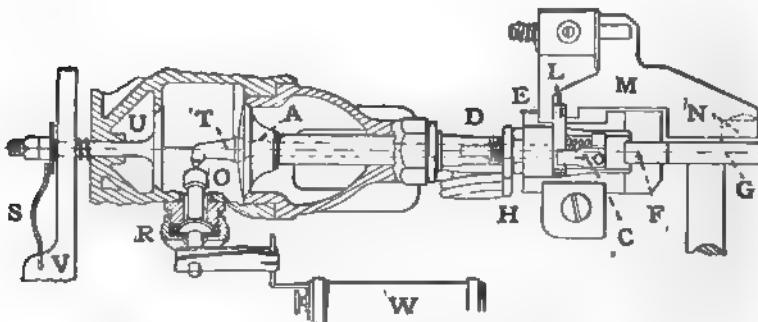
The Duryea Primary Spark Ignition Apparatus. A is the exhaust valve; D, the exhaust valve stem; T, the stem of the spark hammer, journaled in the stem; D; E, the exhaust slide; F, roller at end of E; G, the rotating exhaust cam; H, exhaust valve spring; J, a clamp fixed in position by a set screw; M, pivoted lift that trips the hammer, L, operated by roller, N, beside the exhaust cam, knocking the sparkler, T, away from the insulated plug, O. U is the inlet valve; V, the throttle slide; S, spring controlling the opening of U; W, the spark coil; R, the metal union nut, clamping O in place.
